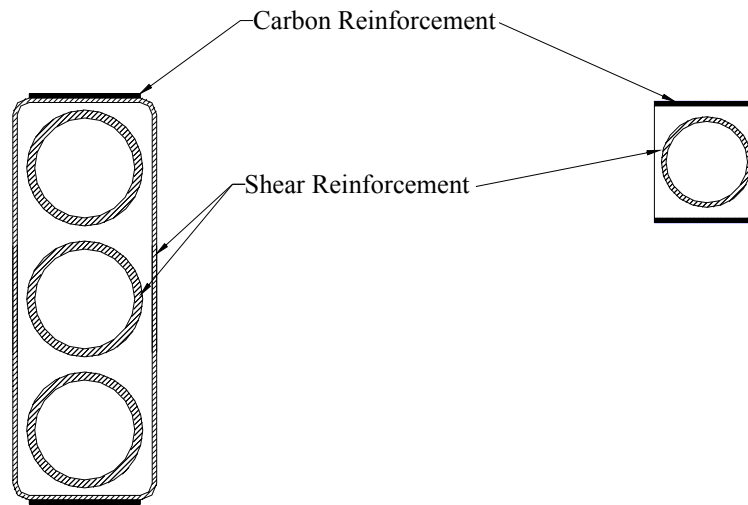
Cross Sections of Chassis Rail and Cross Member of Concept Four
